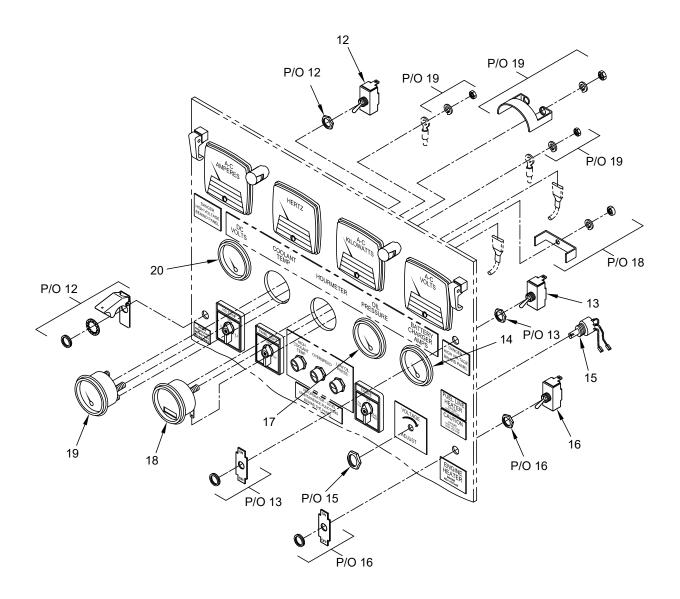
Control Panel Assembly (Sheet 2 of 4).
